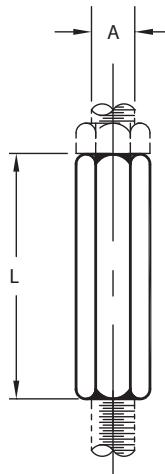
is used to connect rods up to 1½ inch diameter. The Rod Coupling is made of carbon steel and can be welded to the rod after assembly.
